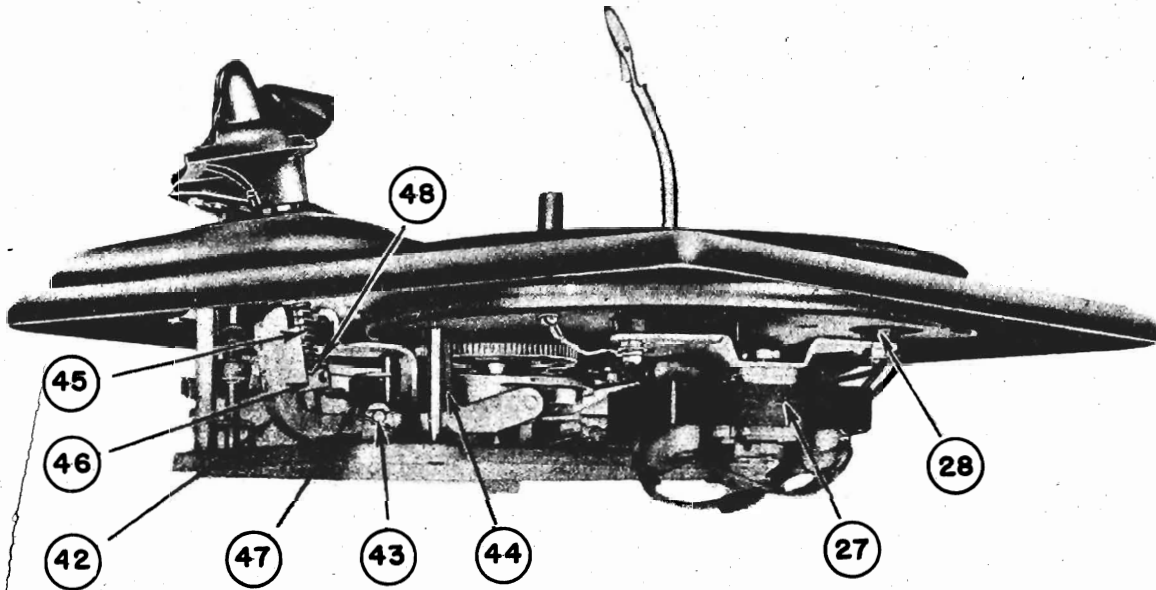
PARTS LOCATION -- LEFT SIDE VIEW
